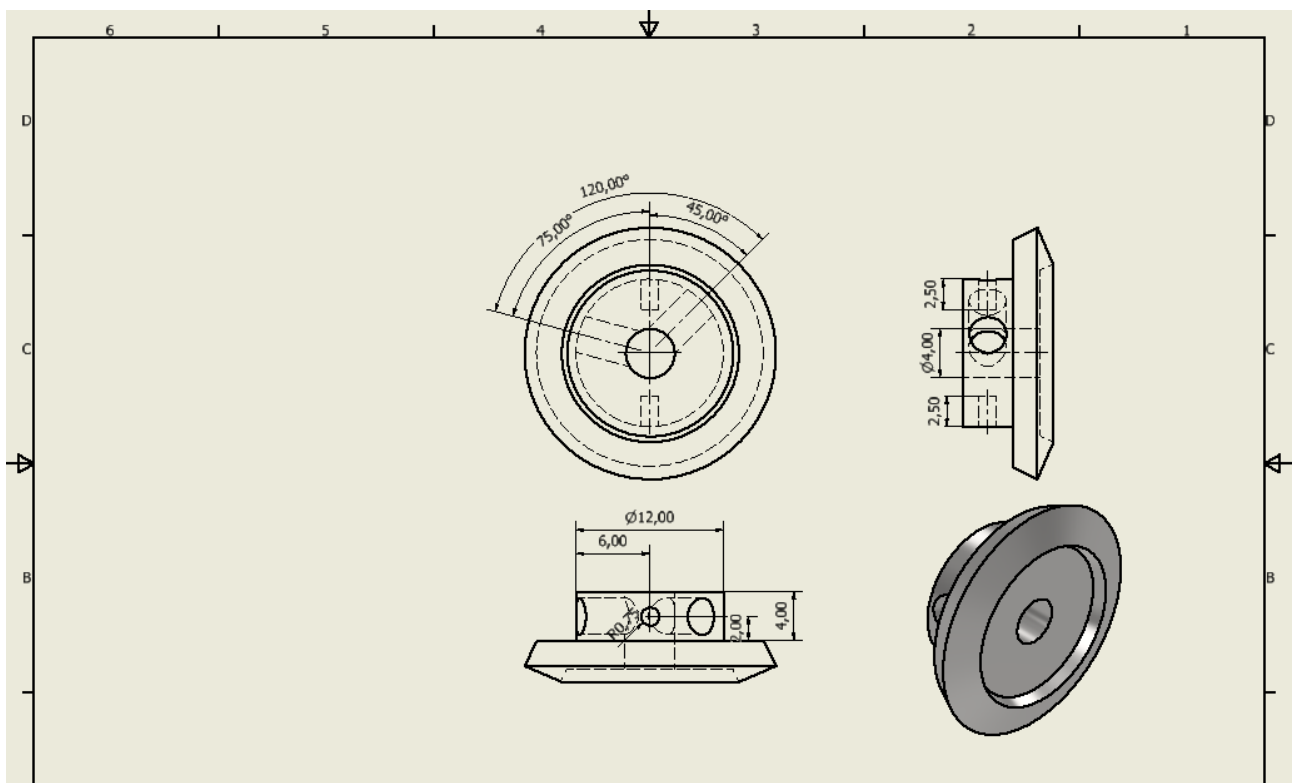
technical drawing illustrating the machining operations on the fifth wheel for thumb rotation
